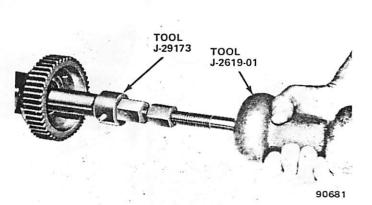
D-33 Mainshaft Pilot Bearing Removal
